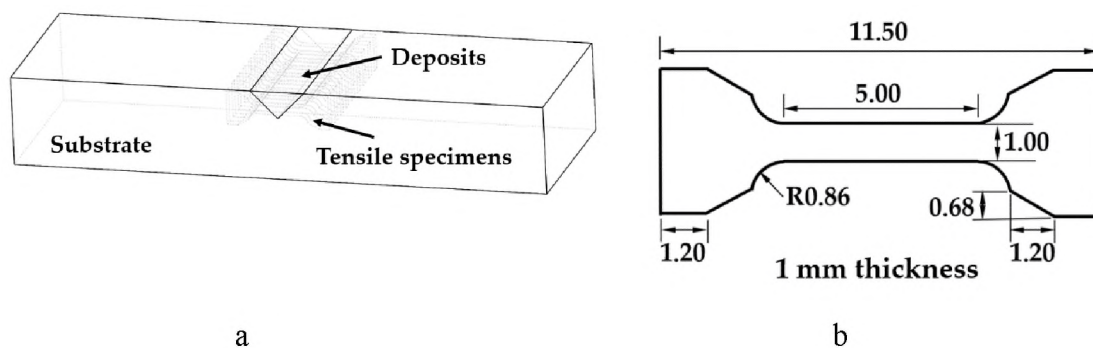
(a) Preparation of tensile specimens from repaired parts; (b) dimensions of tensile specimens (unit: mm).
